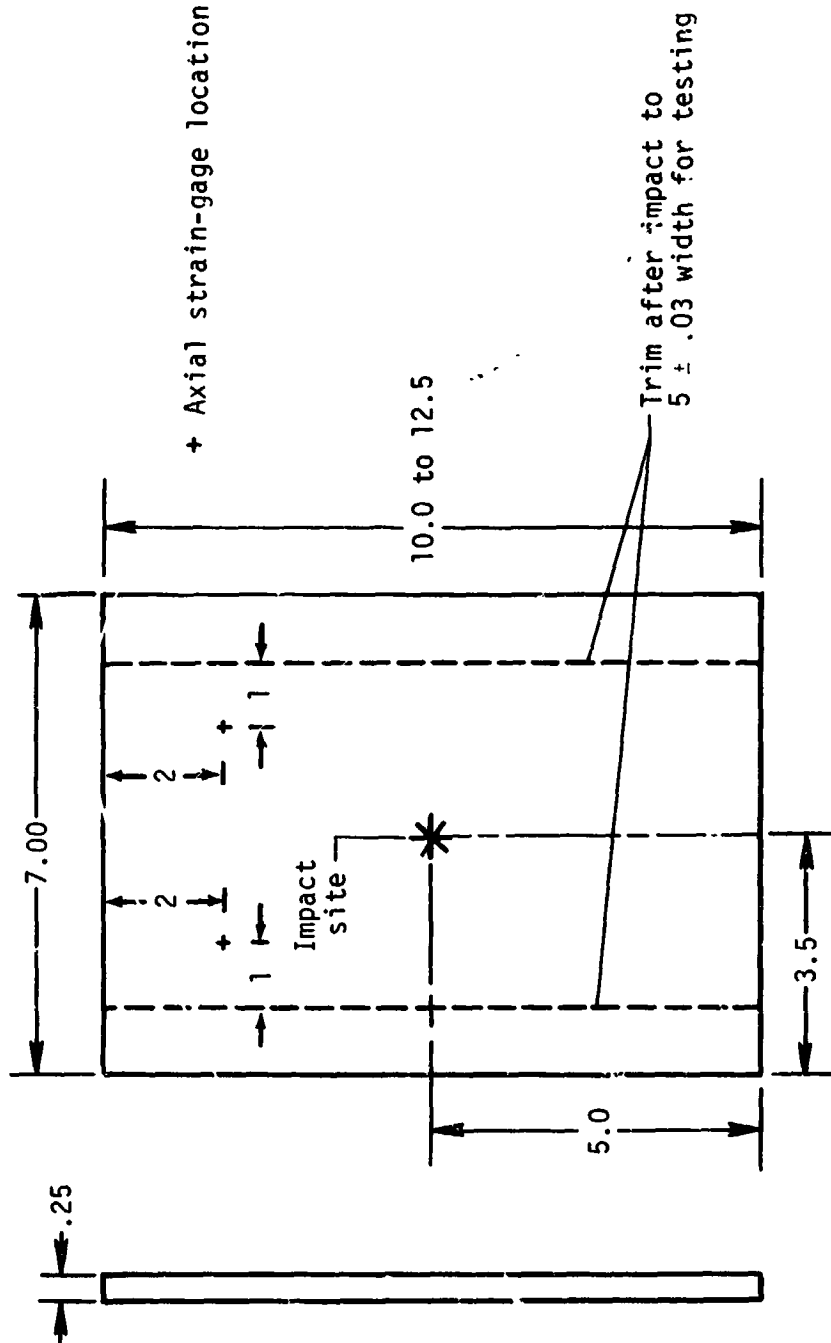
Compression after impact test specimen. Dimensions are in inches.
